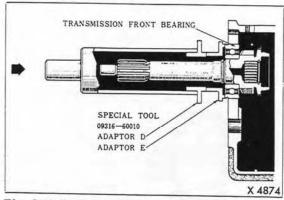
Installing the transmission front bearing in the case with special tool.
